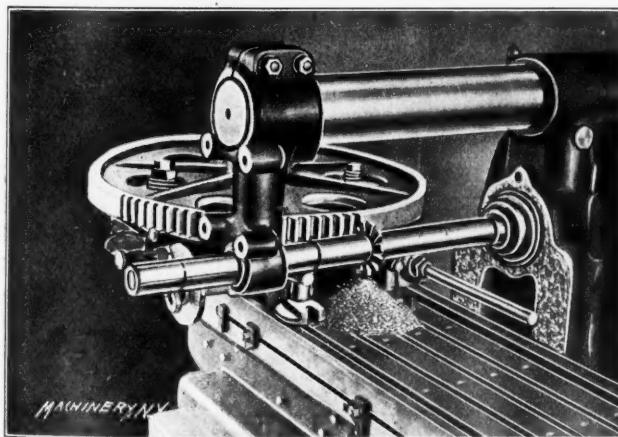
Using the Circular Milling Attachment as an Indexing Device for Cutting a Large Gear.
